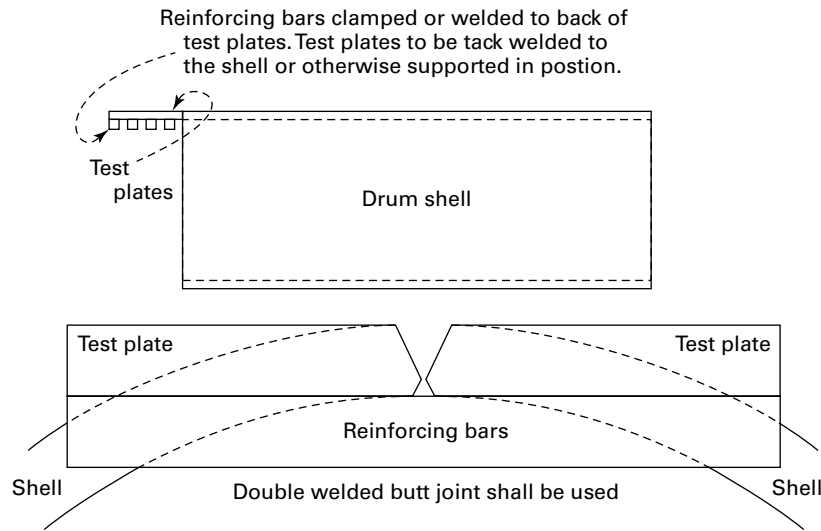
METHOD OF FORMING LONGITUDINAL TEST PLATES
